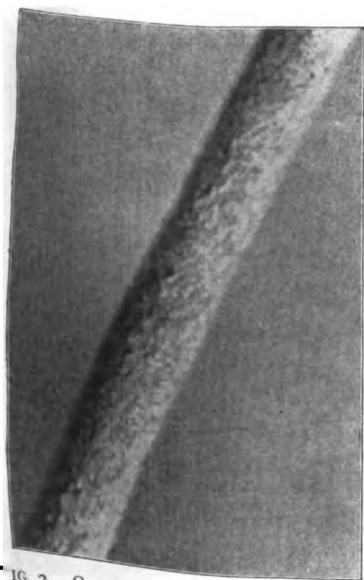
Corrosions on Surface of Aluminium Wire. Magnified 4 times.
